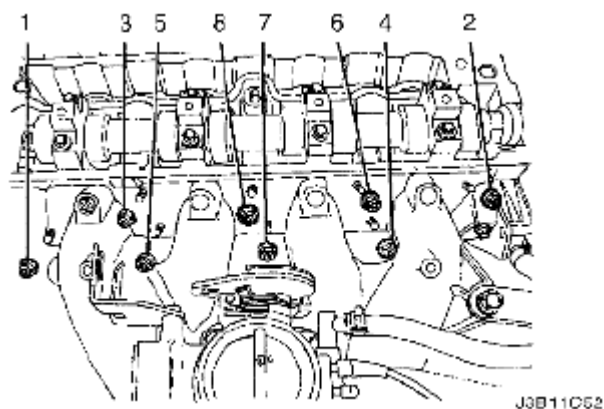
Identifying Intake Manifold Retaining Nuts And Retaining Bolt Removal Sequence
